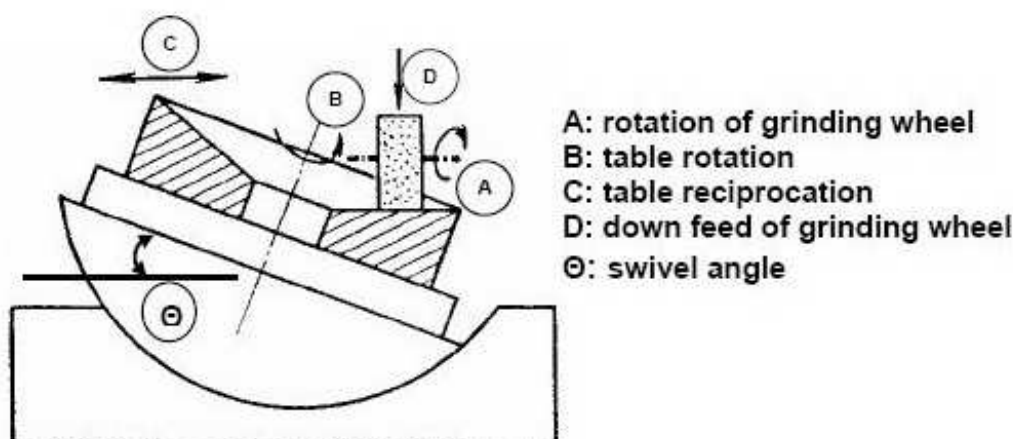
Grinding of a tapered surface in horizontal spindle and rotating table grinding machine
